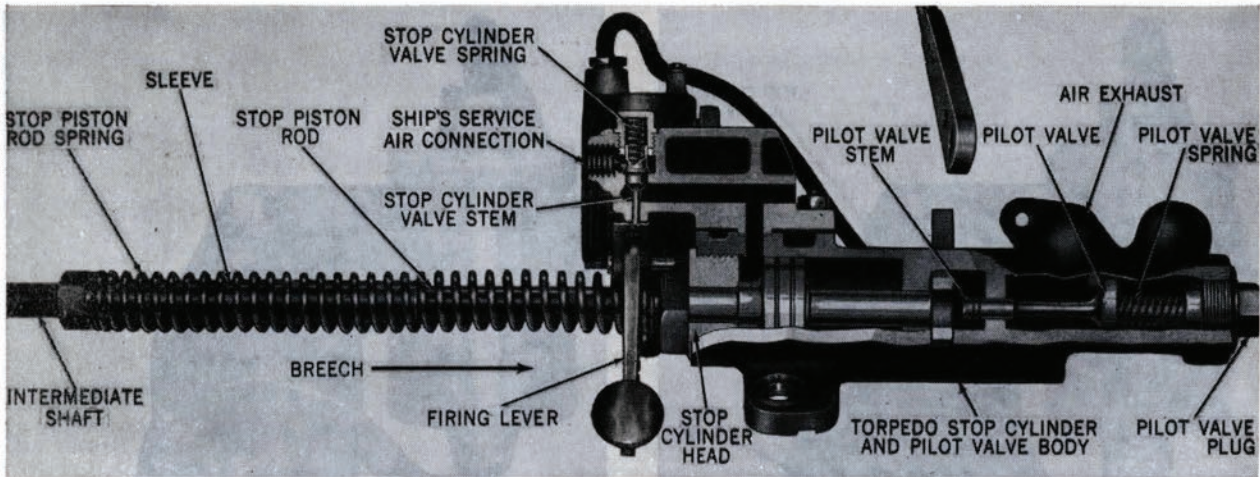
Torpedo Stop Cylinder and Stop Cylinder Pilot Valve—Sectional View.
